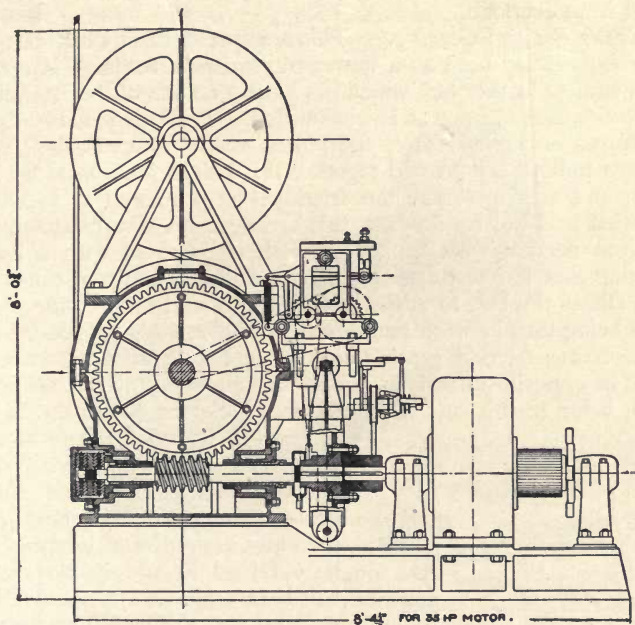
Single Worm Gear Connecting Motor and Hoisting Drum.
